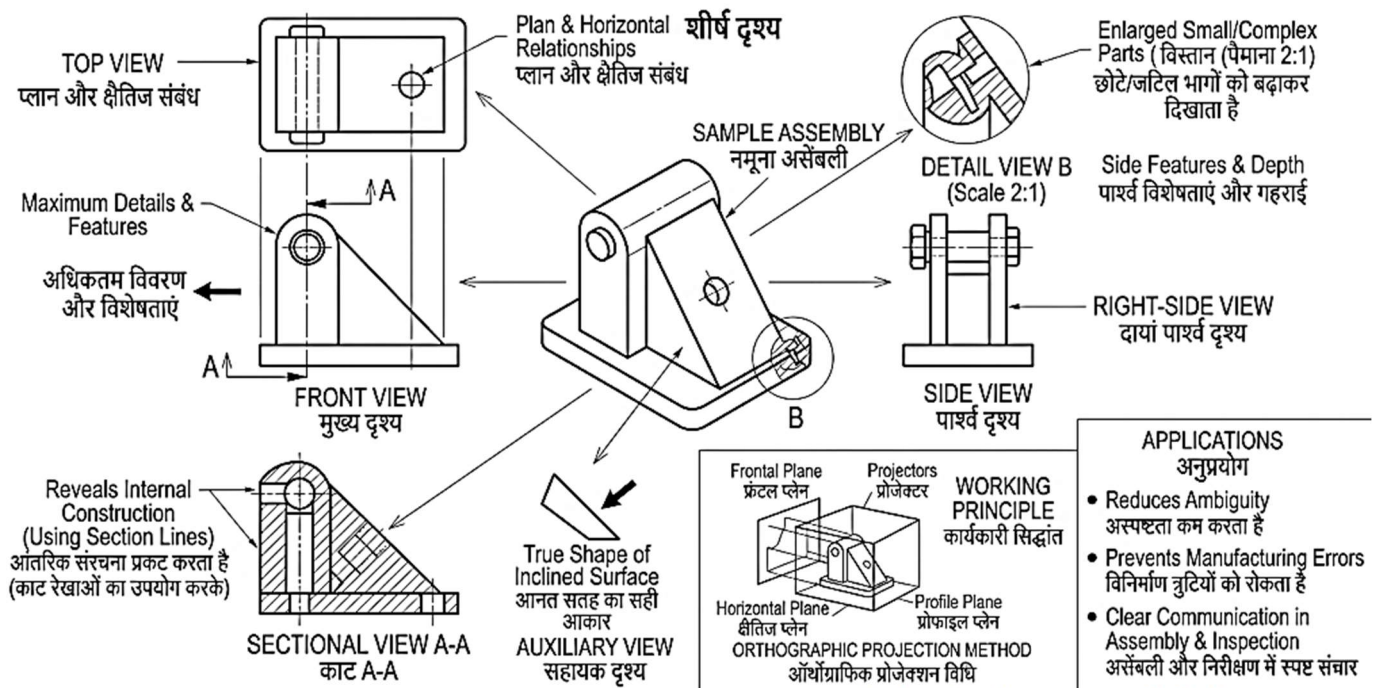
Planning Proper Views in Assembly Drawing | असेंबली आरेख में उपयुक्त दृश्यों की योजना
